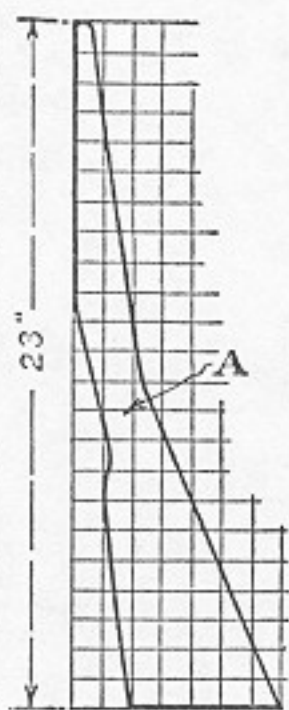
Pattern of Stock of Drill-Gun Shown in Fig. 444
